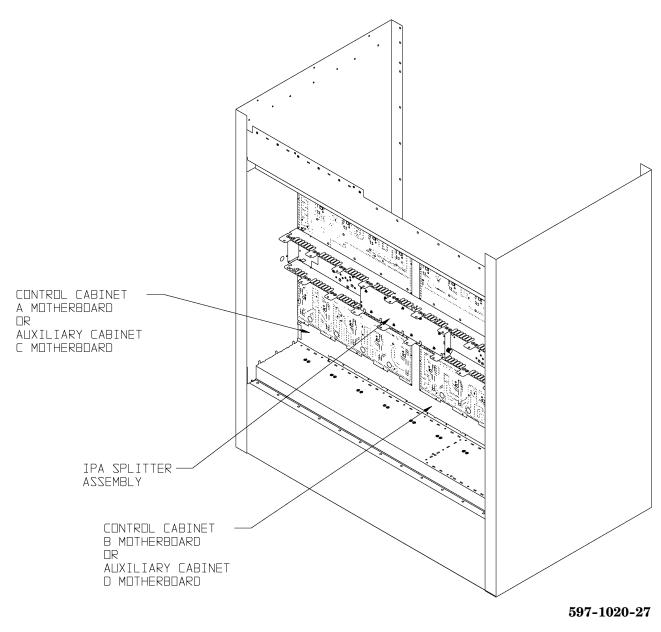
FM-20S/FMi 1405 COMPONENT LOCATOR (SHEET 2 OF 11)
